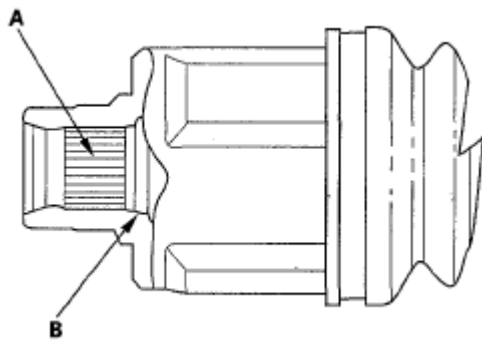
Identifying Whole Splined Surface And Ring Groove
